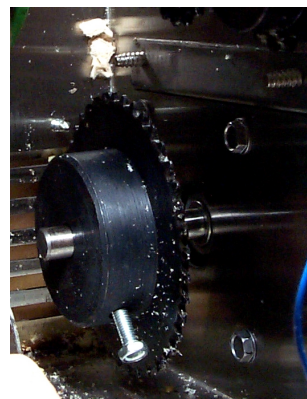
The large sprocket goes on the motor's drive shaft with setscrews facing out. It is critical this sprocket be positioned at the same distance from the cabinet wall as the smaller drive-roller sprockets. The chain must run in a flat plane to prevent popping.
